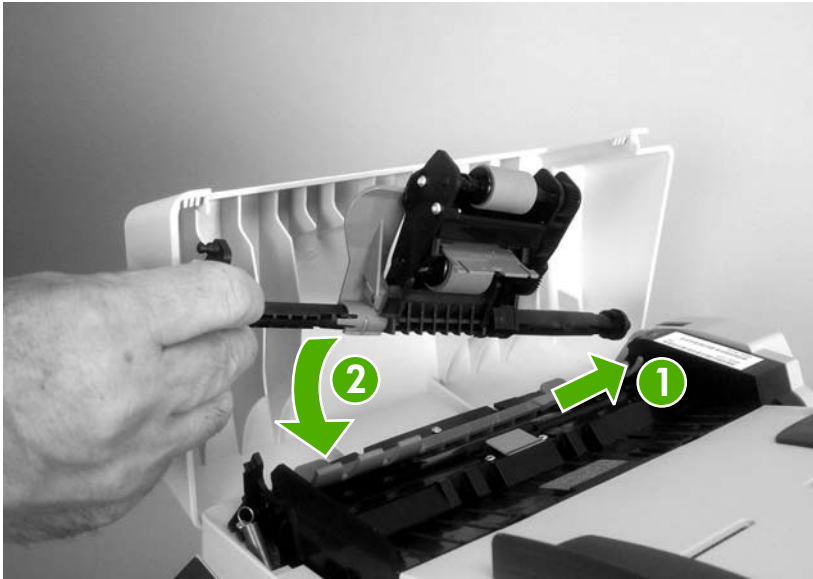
Replacing the ADF pickup-roller assembly (5 of 6)
